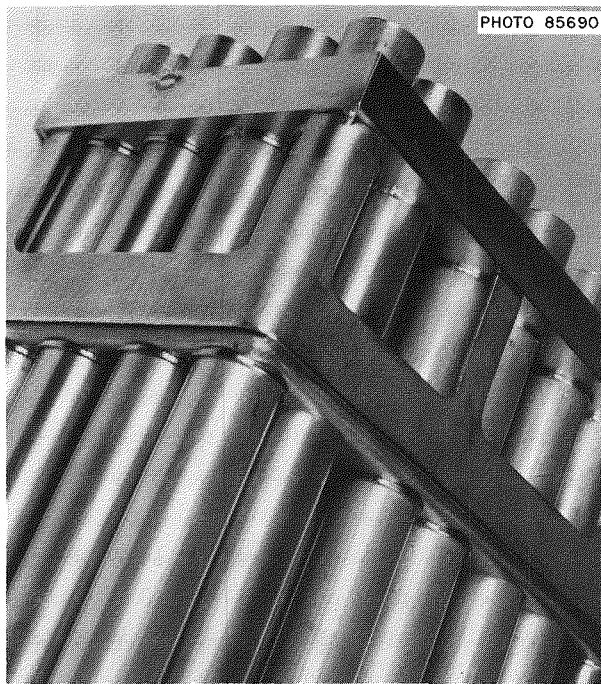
Underside of Upper Tube Sheet and Cooling Pan from Improved Pressure Shell Job Sample. Note stainless steel rings around tubes to control brazing alloy run-through.
